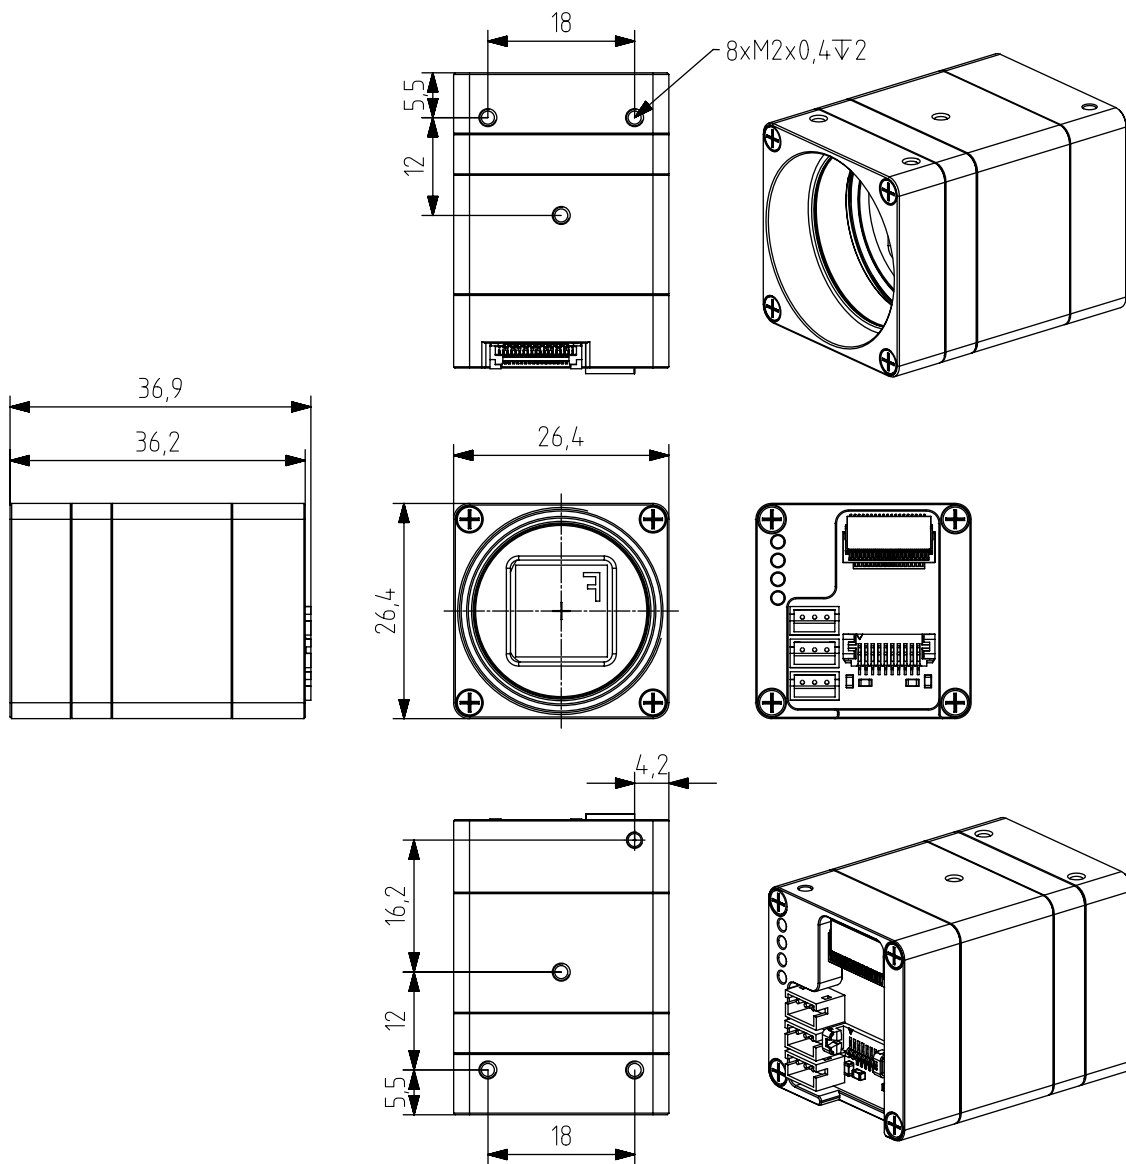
Dimensional drawing of MX042xG-CM-X2G2-FF (C-mount (with C-mount module B))
